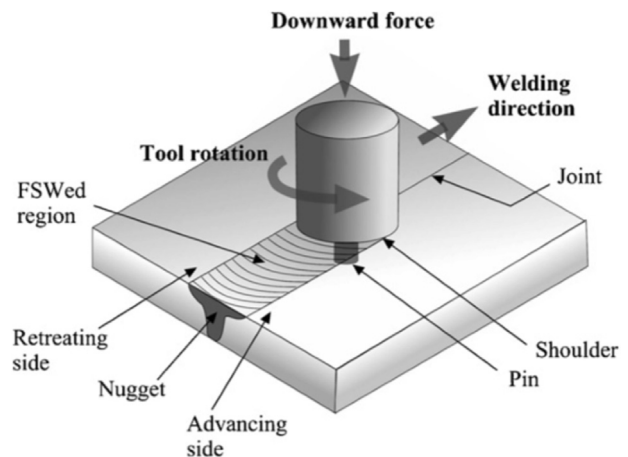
A Schematic diagram of a friction stir welding (FSW) process [69].
